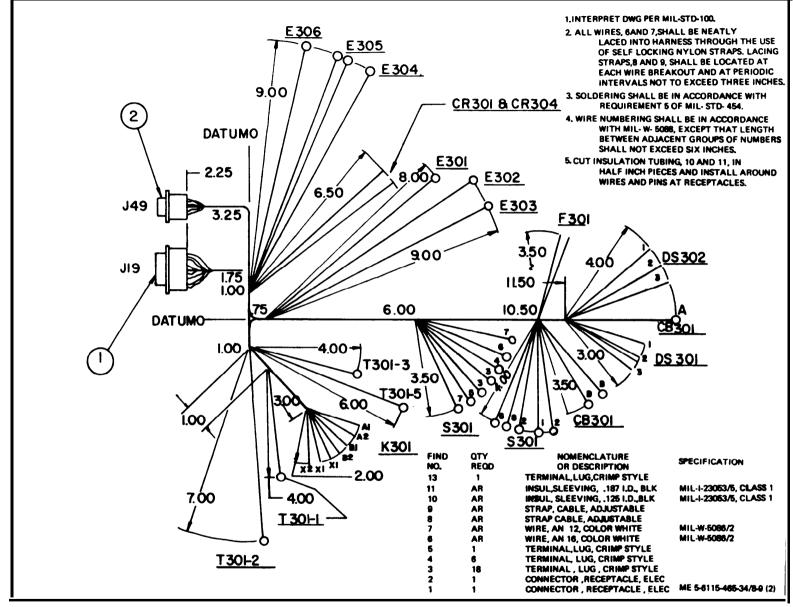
Electric Winterization Kit Heater Control Assembly Wiring Harness (Sheet 2 of 2), Dwg. 70-1233.
